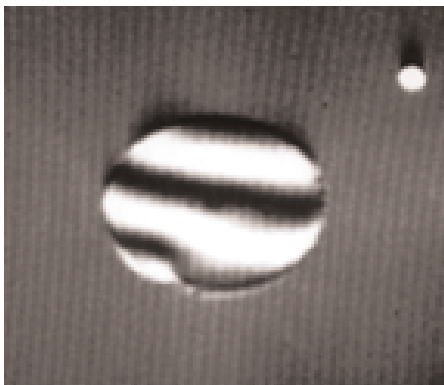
A typical F-BK2 cleave is clean, flat and perpendicular.
